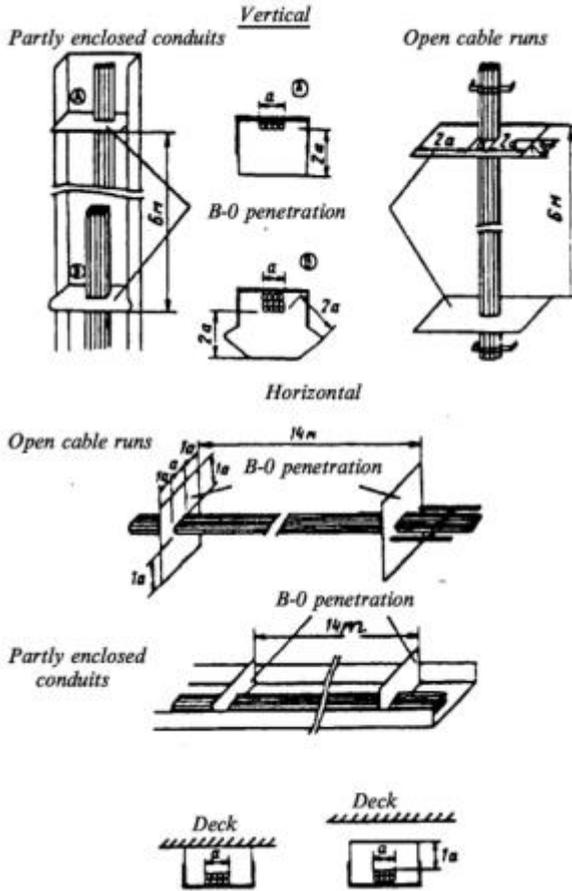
,c. Protection of cable runs with B-0 type fire-retarding structures
